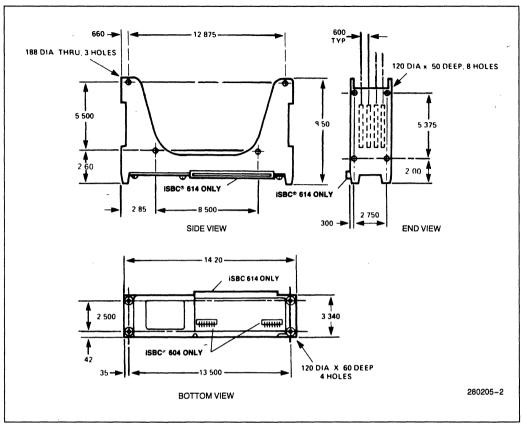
iSBC® 604/614 Cardcage Assembly Dimensions
